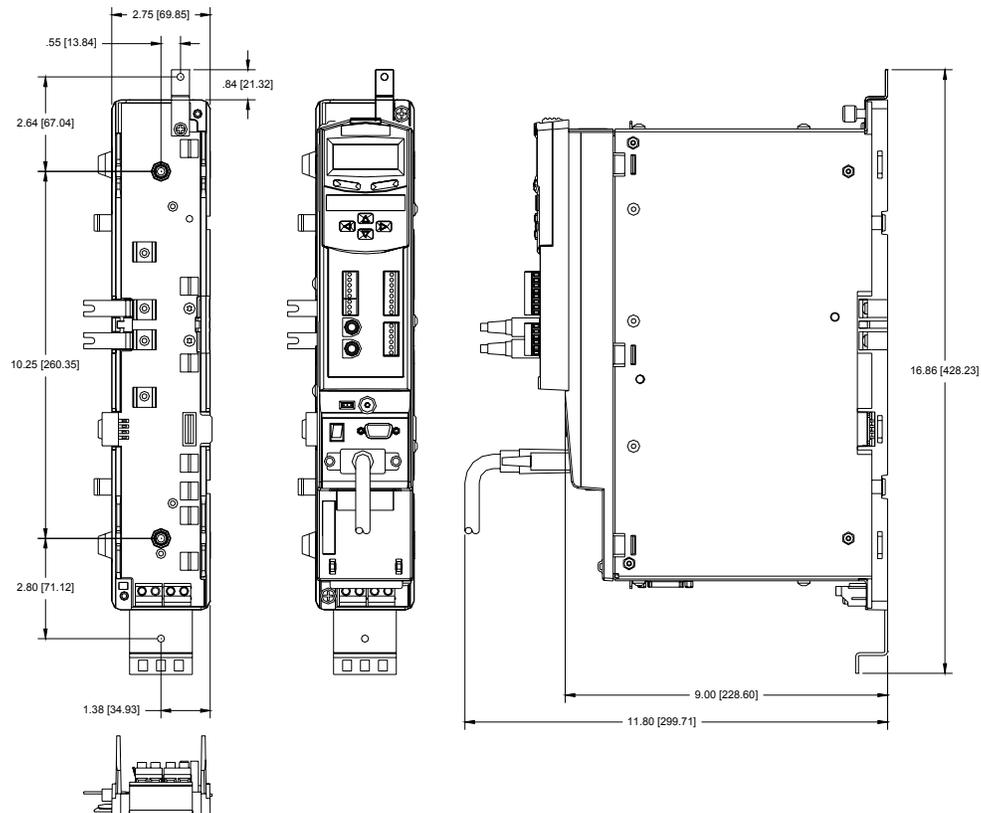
MD-404, 407 and 410 Dimensional Drawing
